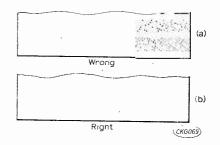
(a) A narrow cut in a copper rail can is easily bridged with solder or dirt so a wide cut (b) is much preferred.
